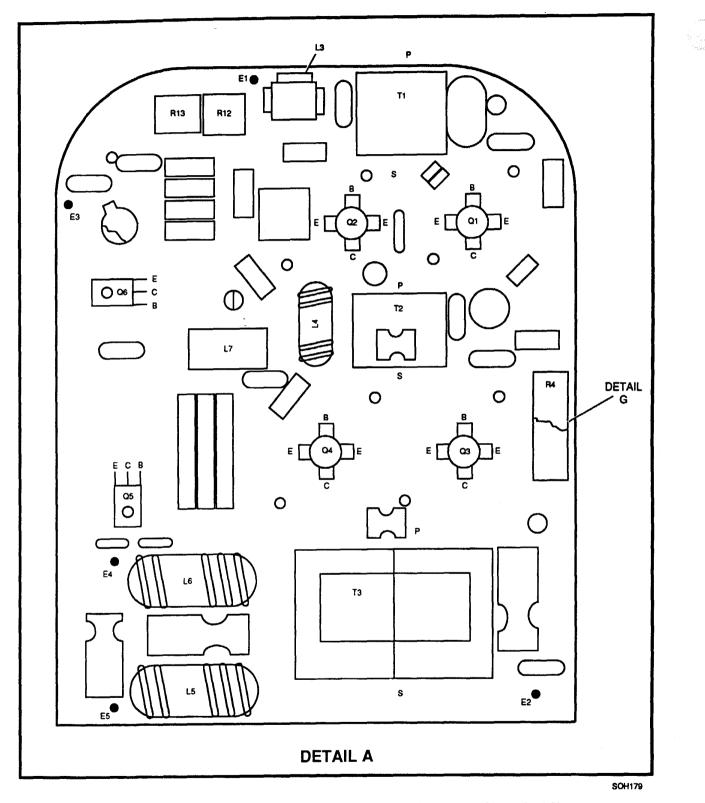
Disassembly of the A13 Power Amplifier Board (Sheet 1 of 3)
